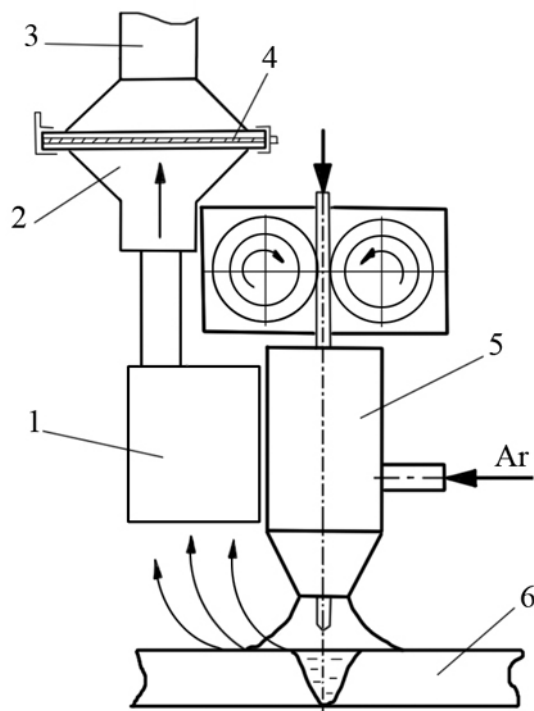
Scheme of the stand for sampling WF during MIG welding with solid wires: 1 – catching nozzle (covering the welding zone); 2 – filter holder chamber (measuring and distribution chamber); 3 – nozzle to the aspirator; 4 – filter for chemical analysis; 5 – burner; 6 – metal to be welded.
